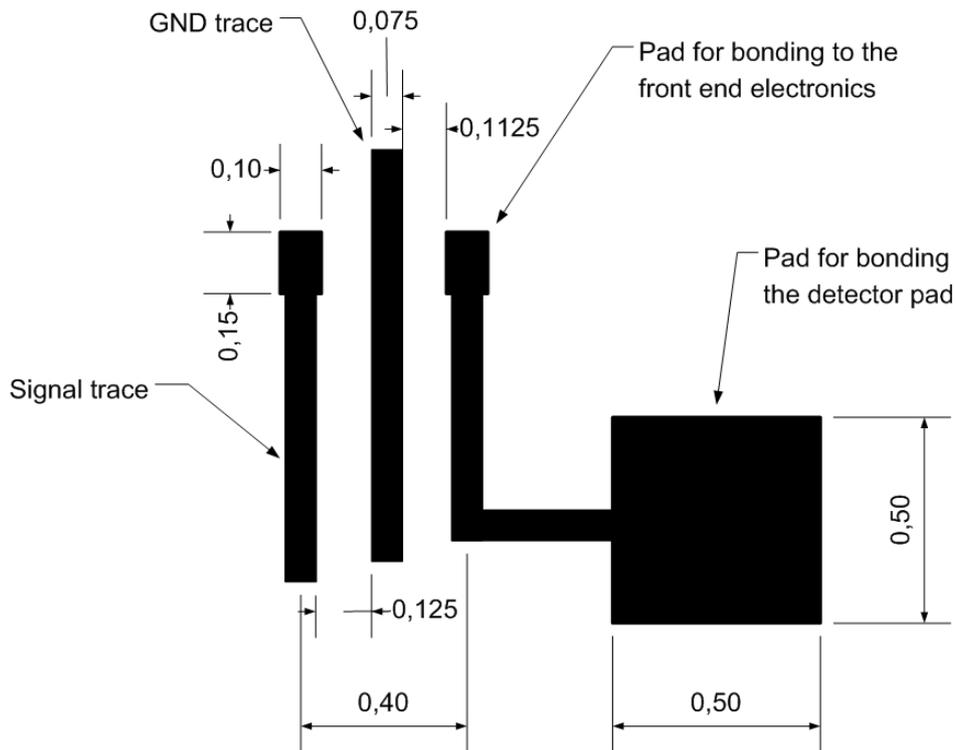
Detailed view of pads and signal traces of the fan out (all dimensions in mm).
